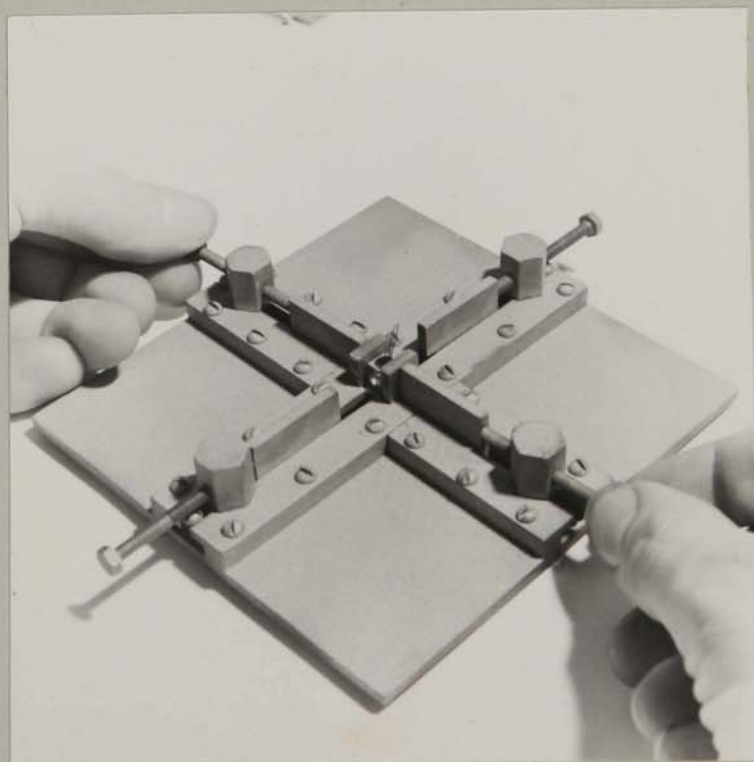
PRESSURE CELL ASSEMBLY RIG
